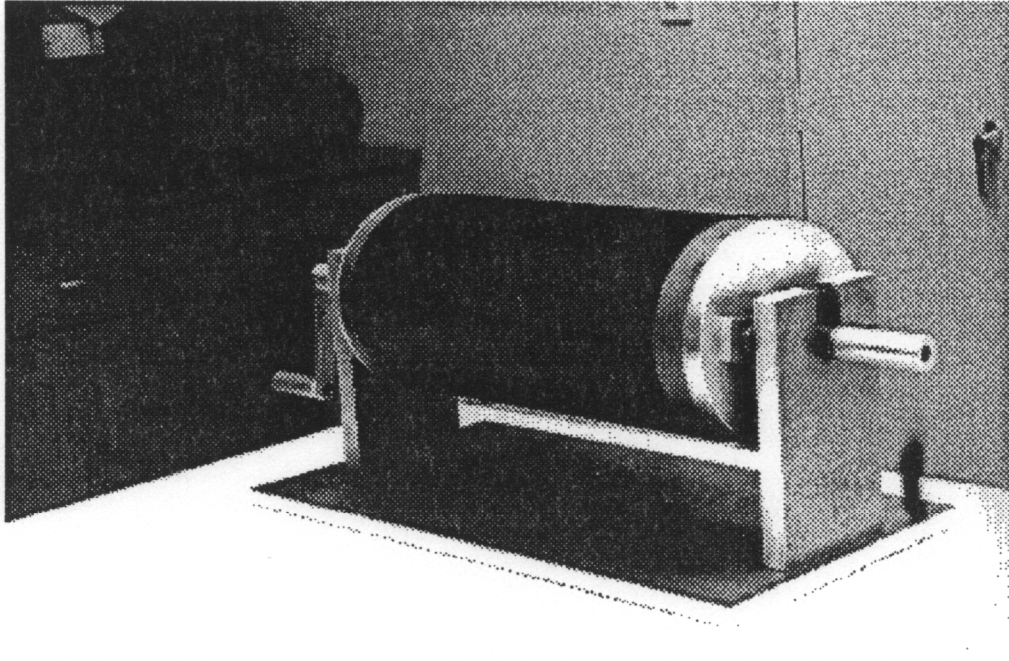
Completed Lay-Up on Mandrel in Support Fixture.
